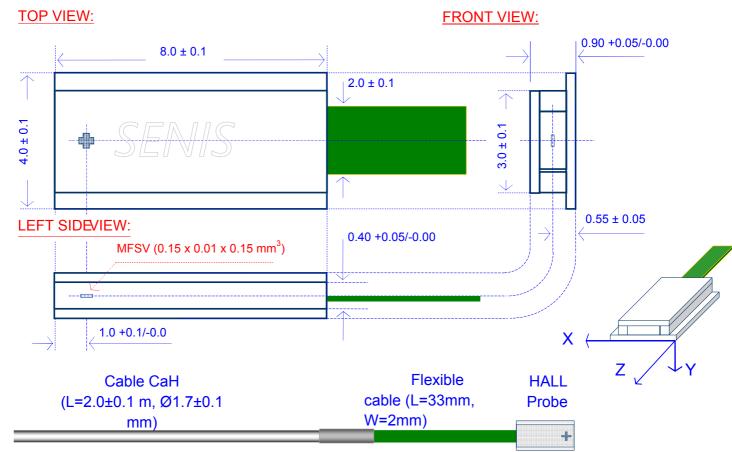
Dimensions of the standard F3A-03C02C Hall probe and cable CaH (Module H)
